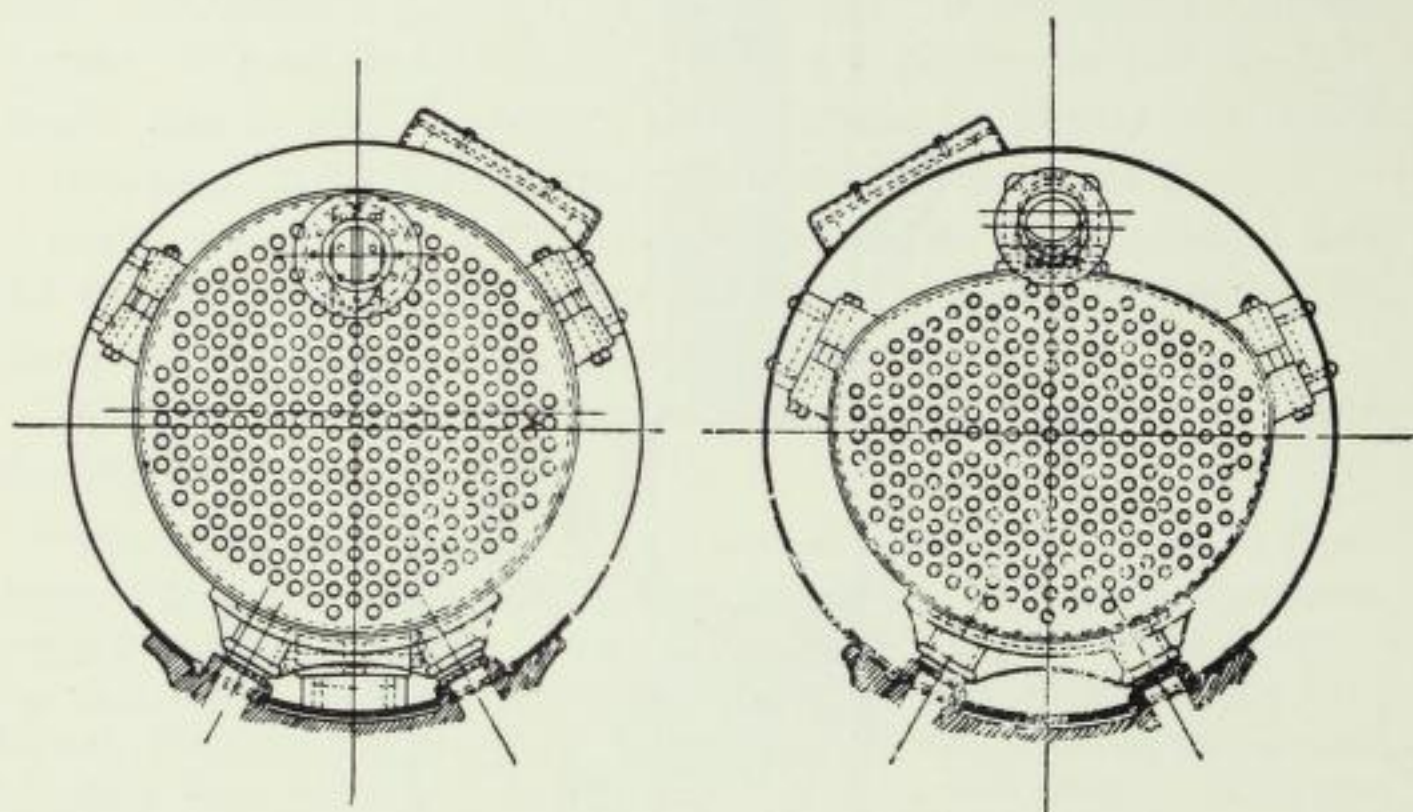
Cross Section of Separable Boiler, showing Baldwin Superheater and Reheater.
